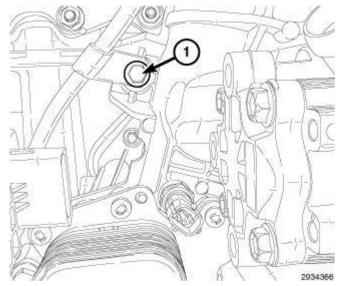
Upper Oil Dipstick Bolt Courtesy of CHRYSLER LLC
